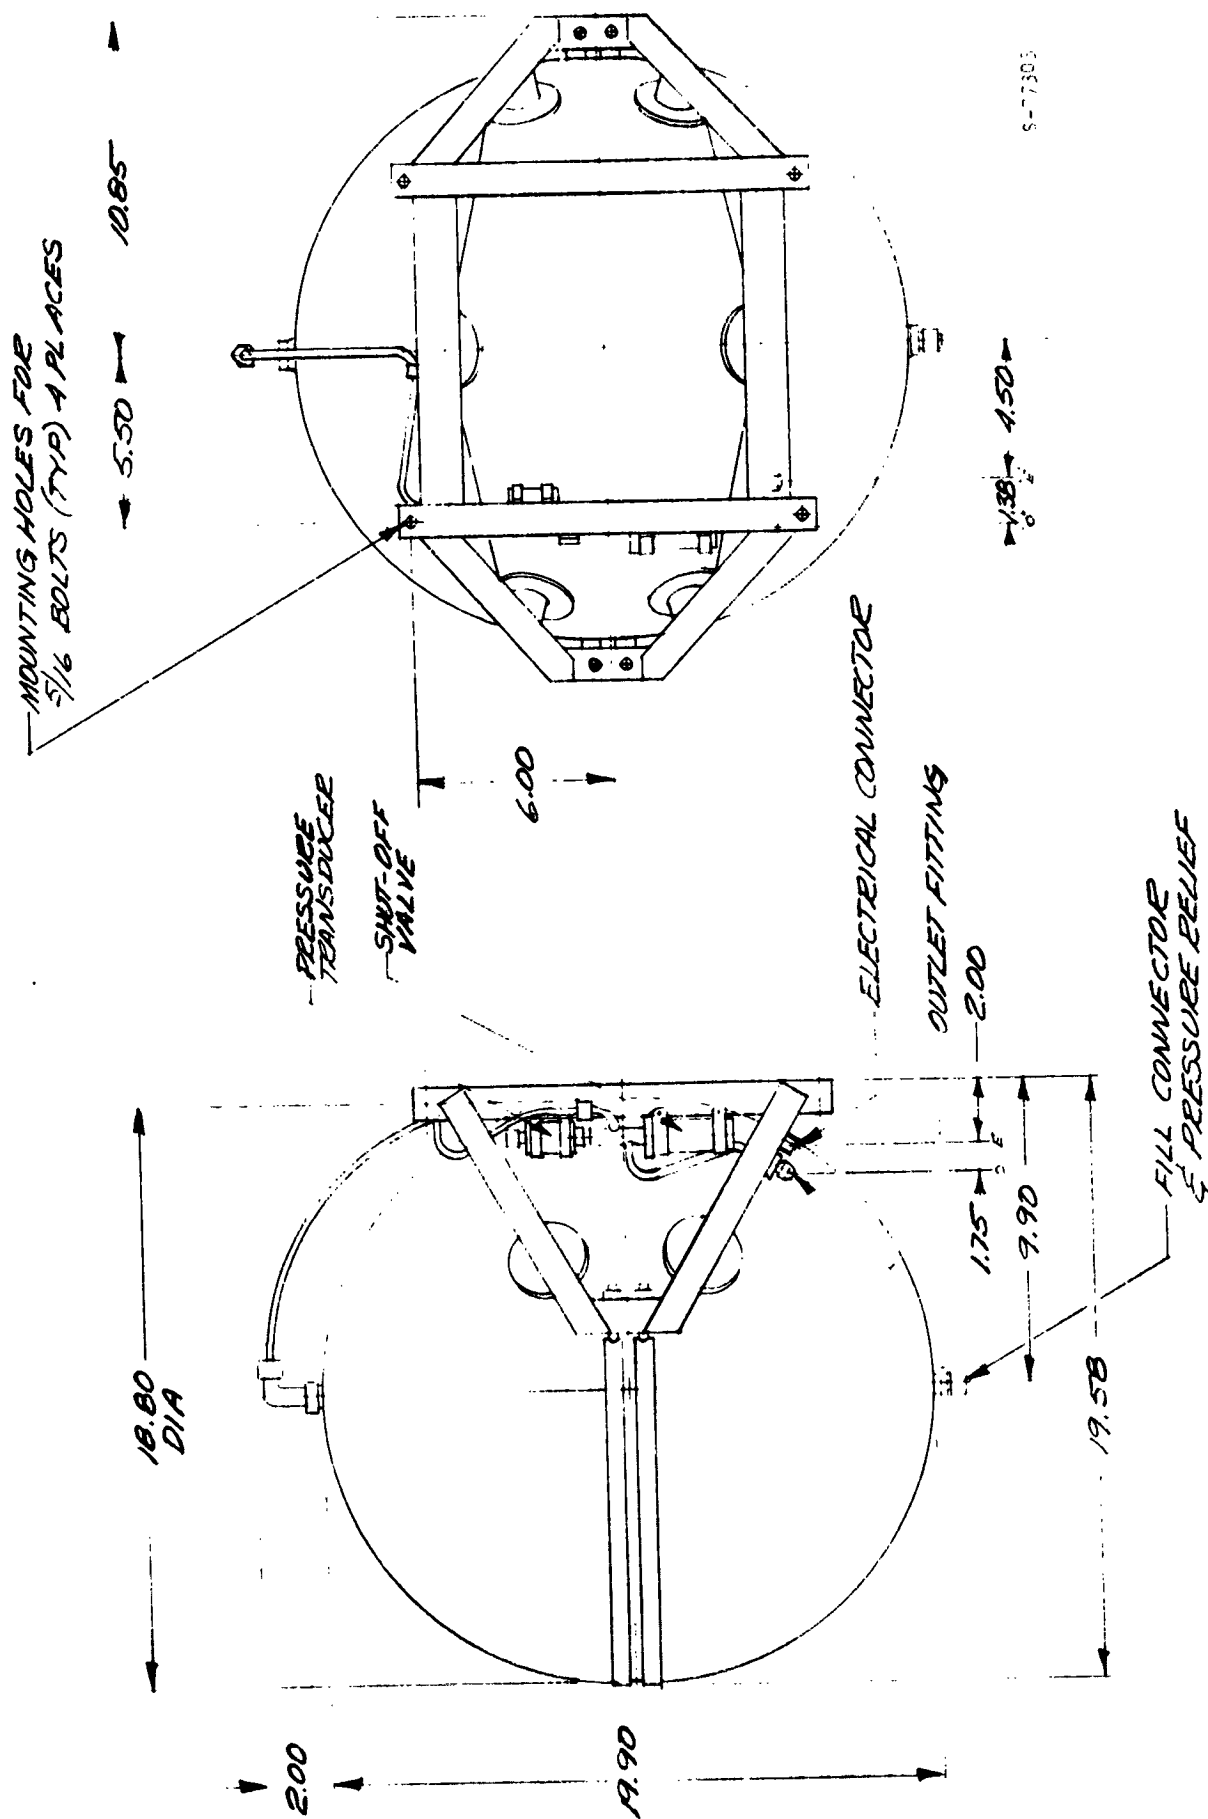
Oxygen-Nitrogen Storage Tank Assembly, IRU 1-M
